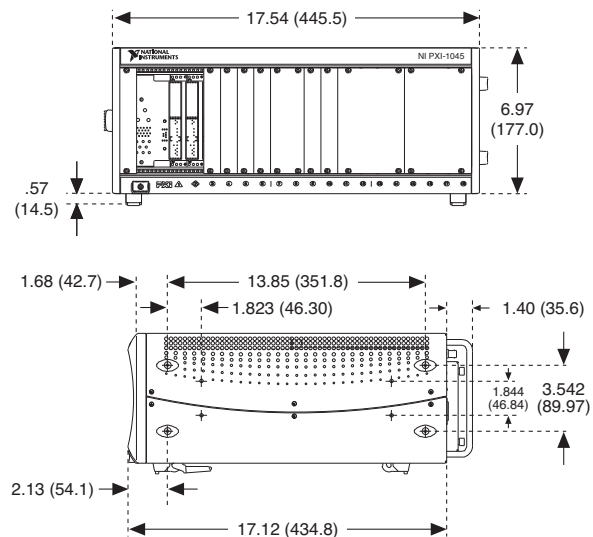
PXI-1045 Front and Side Dimensions in Inches (mm)
